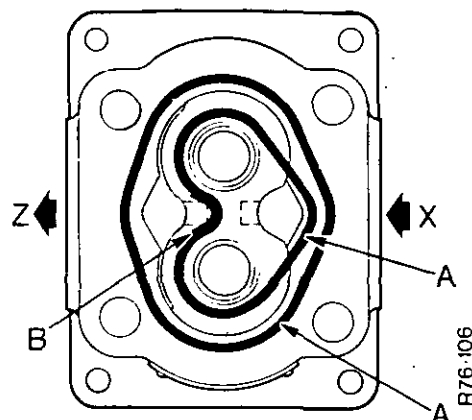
FITTING SEALS INTO THE PUMP FLANGE AND END COVER
